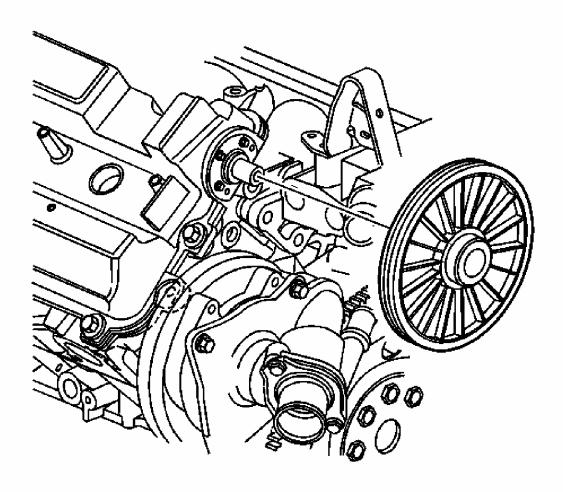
View of Water Pump Drive Pulley Courtesy of GENERAL MOTORS CORP.
